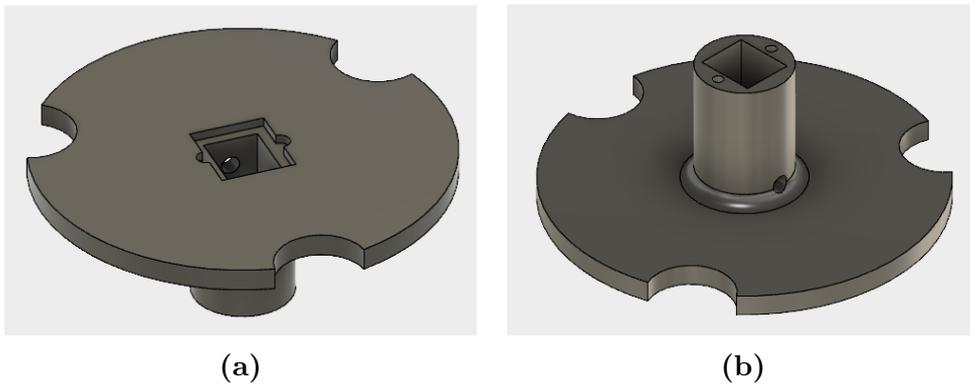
Base shield: (a) Top view; (b) Bottom view.
